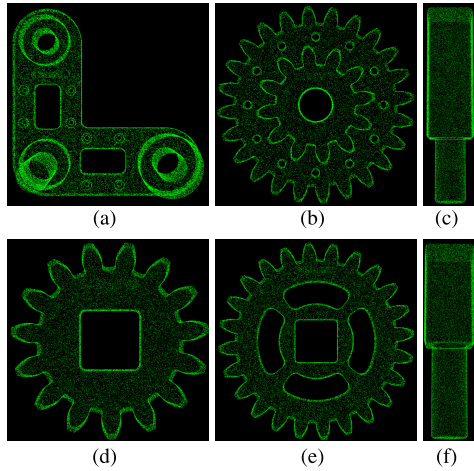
3D Workpiece Model. (a) is the baseplate; (b) (d) and (e) is the gear; (c) and (f) is the shaft.
